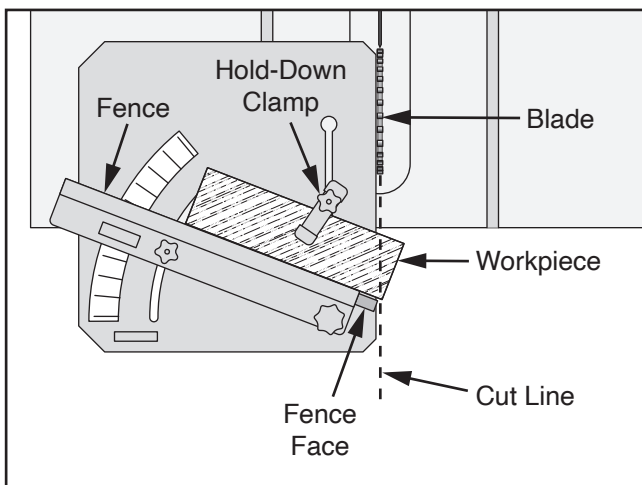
Workpiece prepared for cut (blade guard removed for clarity).
